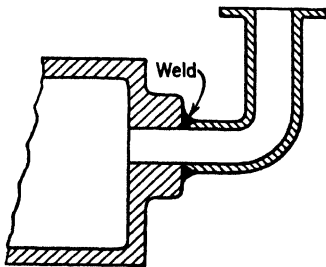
Cast-weld construction. Elbow is made of a special acid-resistant steel to avoid corrosion.
